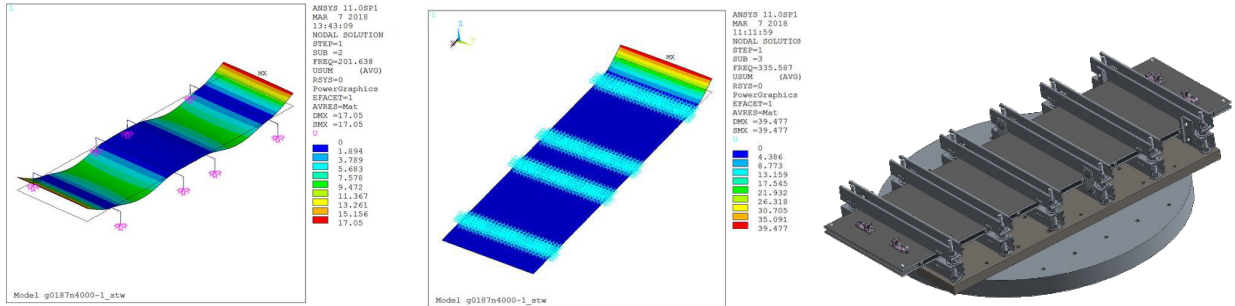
FEA of Blanket Test Fixture (left) and Final Design (right)
